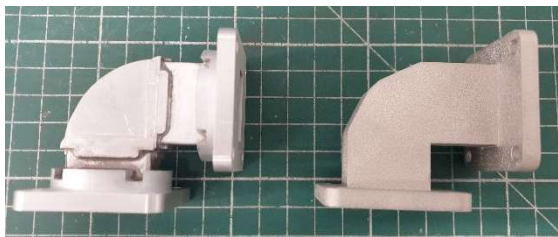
WG16/WR90 Bend assembly. Fabricated and brazed assembly on the left, 3d metal printed on the right.
